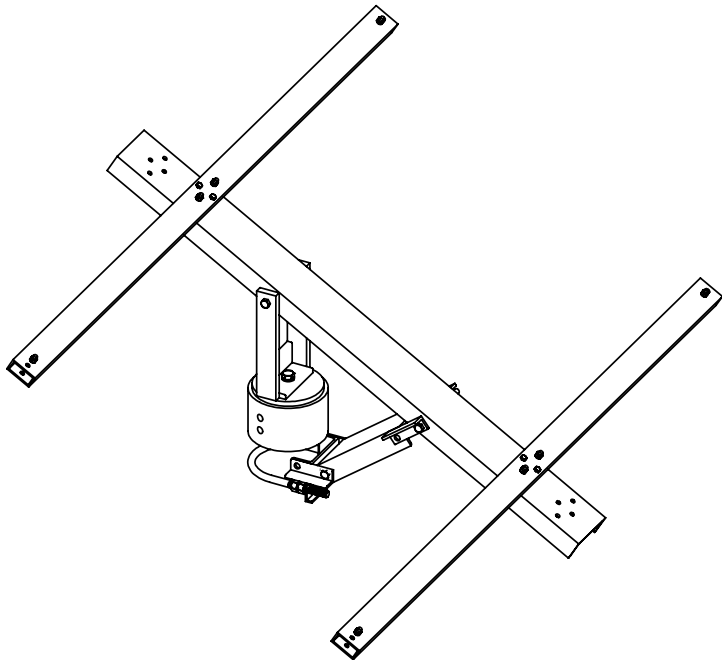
Final Assembly Solar Bracket Top-of-Pole Mount 110 W (2 Panel)
